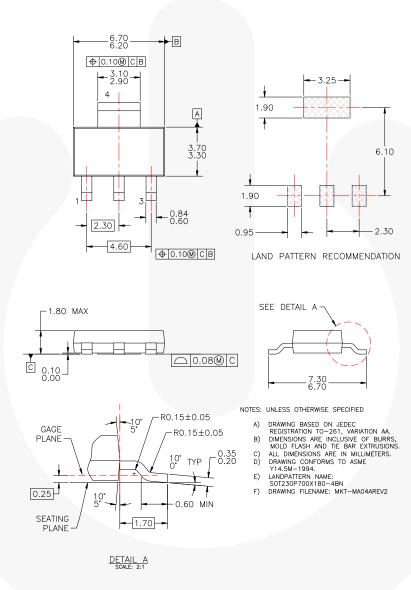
MOLDED PACKAGE, SOT-223, 4 LEAD (ACTIVE)
